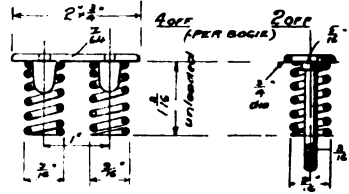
BOLSTER SPRINGS AND BEARING PLATE.
